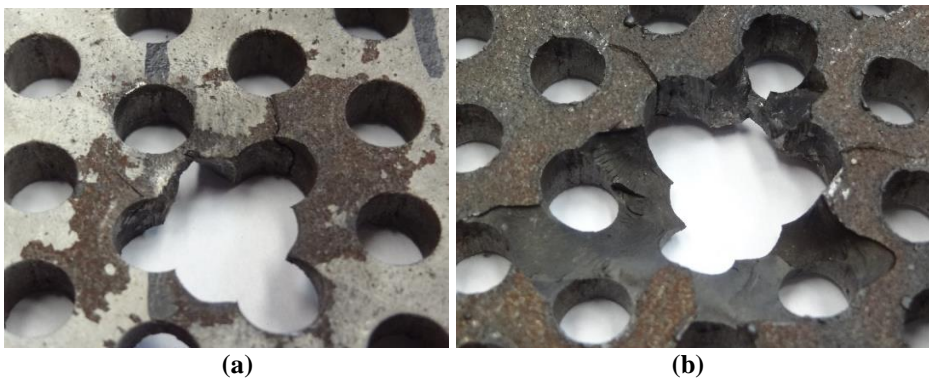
Plate 8-5f /Per 1-L2 after OC2: (a) – shot 2 front surface, (b) – shot 2 rear surface
